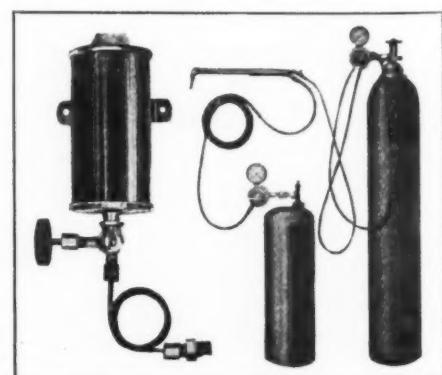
Left, a gasoline primer, showing needle valve and pipe running to the manifold. Right, Dyer welding outfit, showing tanks, gauges, reducing valves and torch
